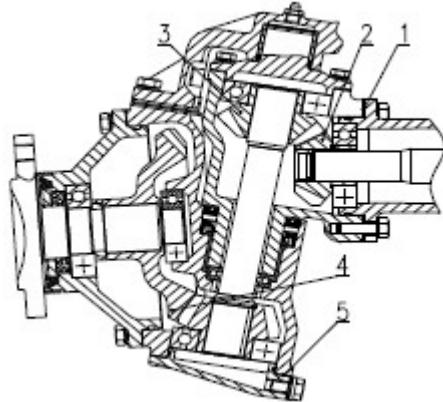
Adjustment of Side Drive of Front Drive Axle
